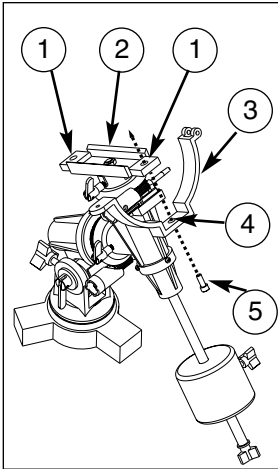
Attach cradle rings to the saddle plate with attachment screws.
